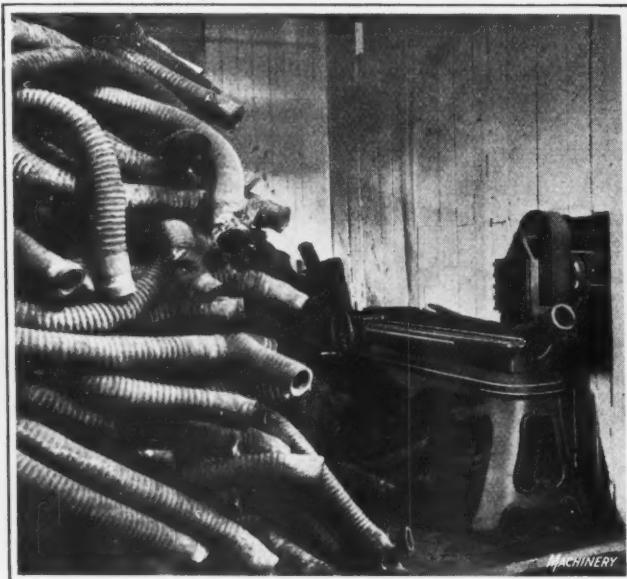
Slitting Armored Rubber Steam Hose preparatory to removing the Wire
